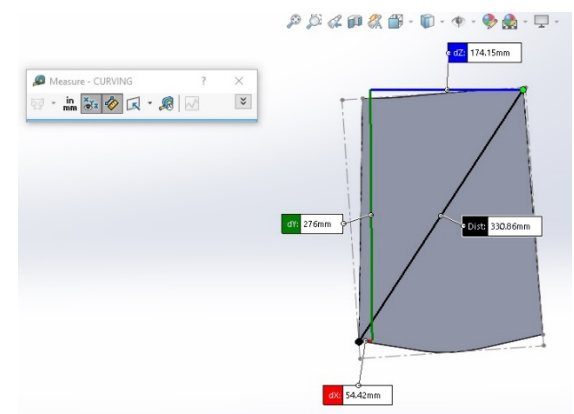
Flattening and acquiring the initial dimensions using Solidworks® software
